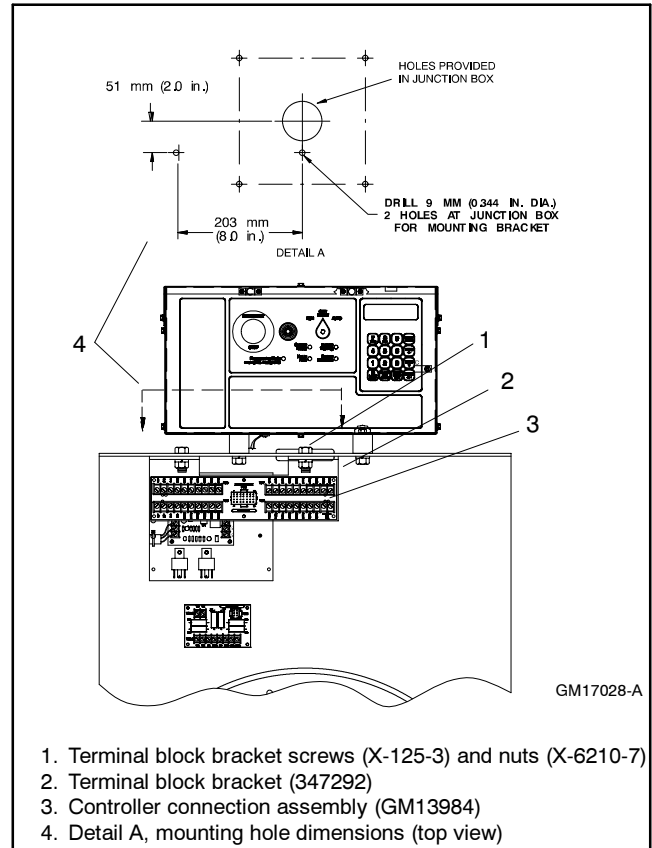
Terminal Block Bracket and Controller Connection Assembly Mounting (350/400 kW)
